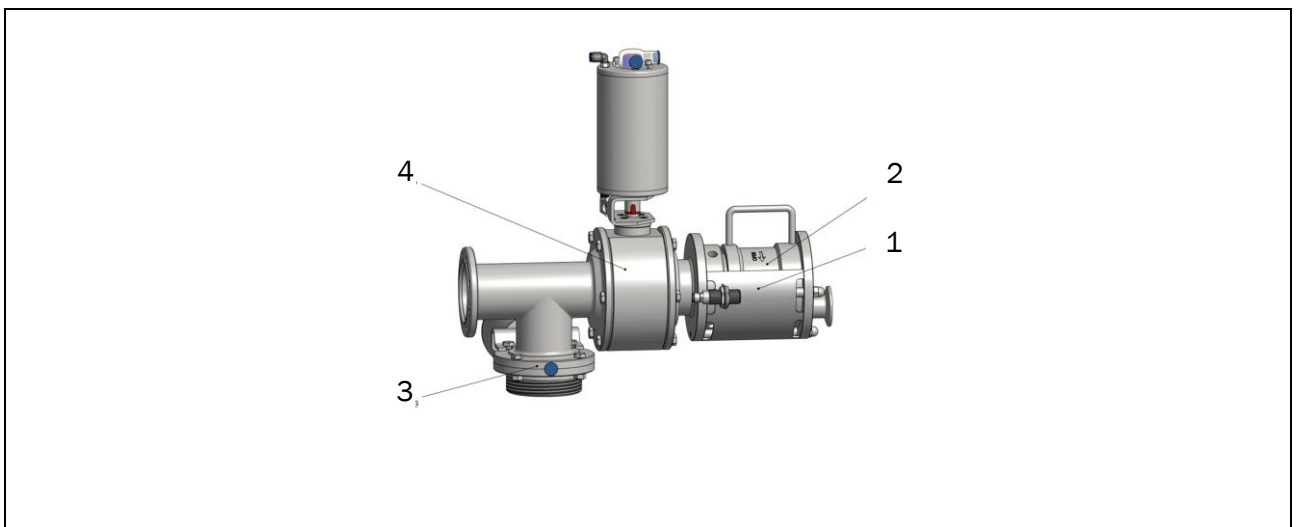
Overview of Plug-in Chamber with Ball Valve and Butterfly Valve
